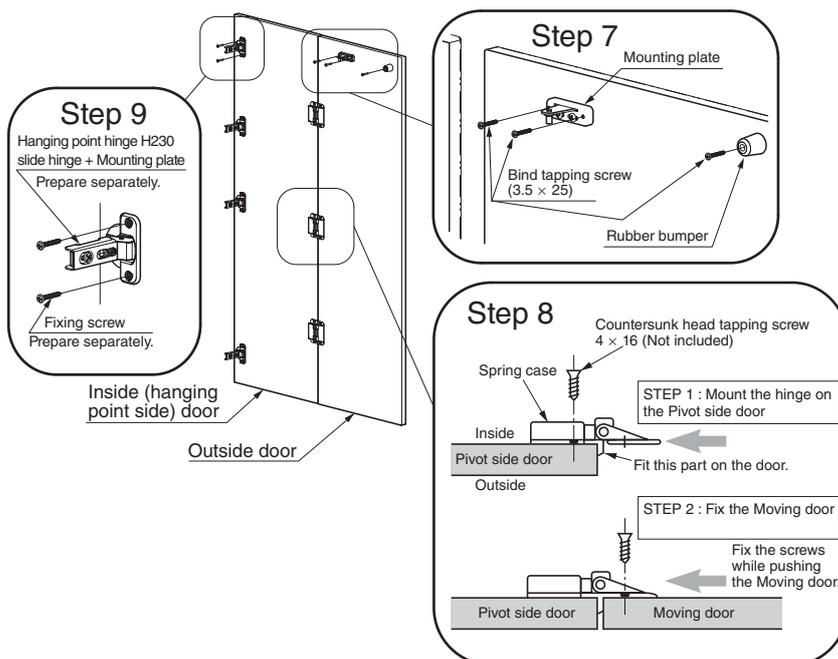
Installation of mounting plate and hinges (for right-hand side)
